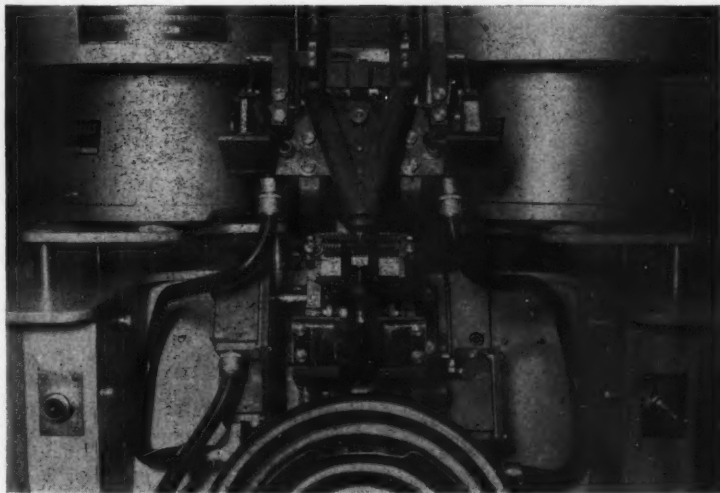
Close-up view of the Hymatic machine with a valve located on the probe and just about to pass between the two soaping brushes. The spring-loaded clamp is seen in the open position
